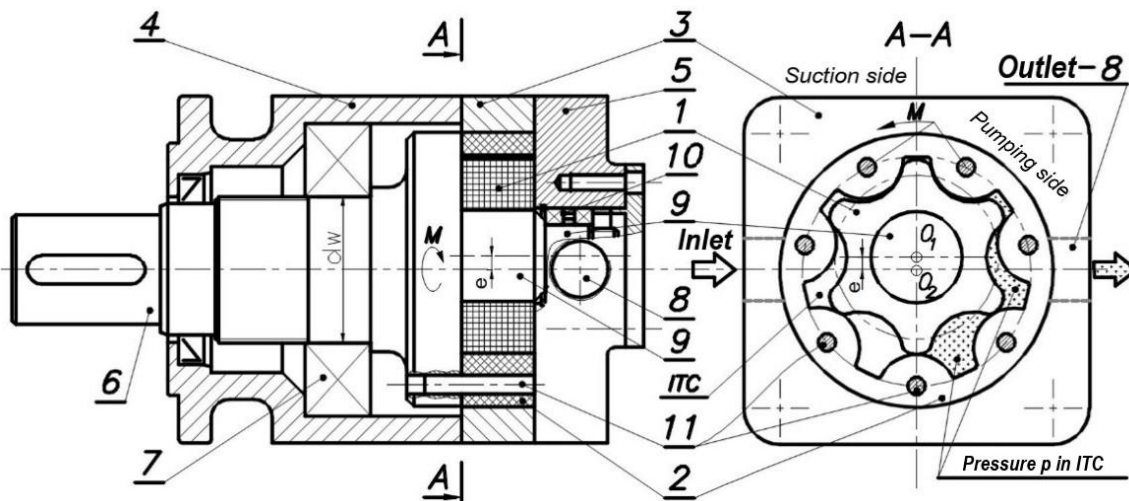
Scheme of a hydraulic gerotor machine according to the new concept
